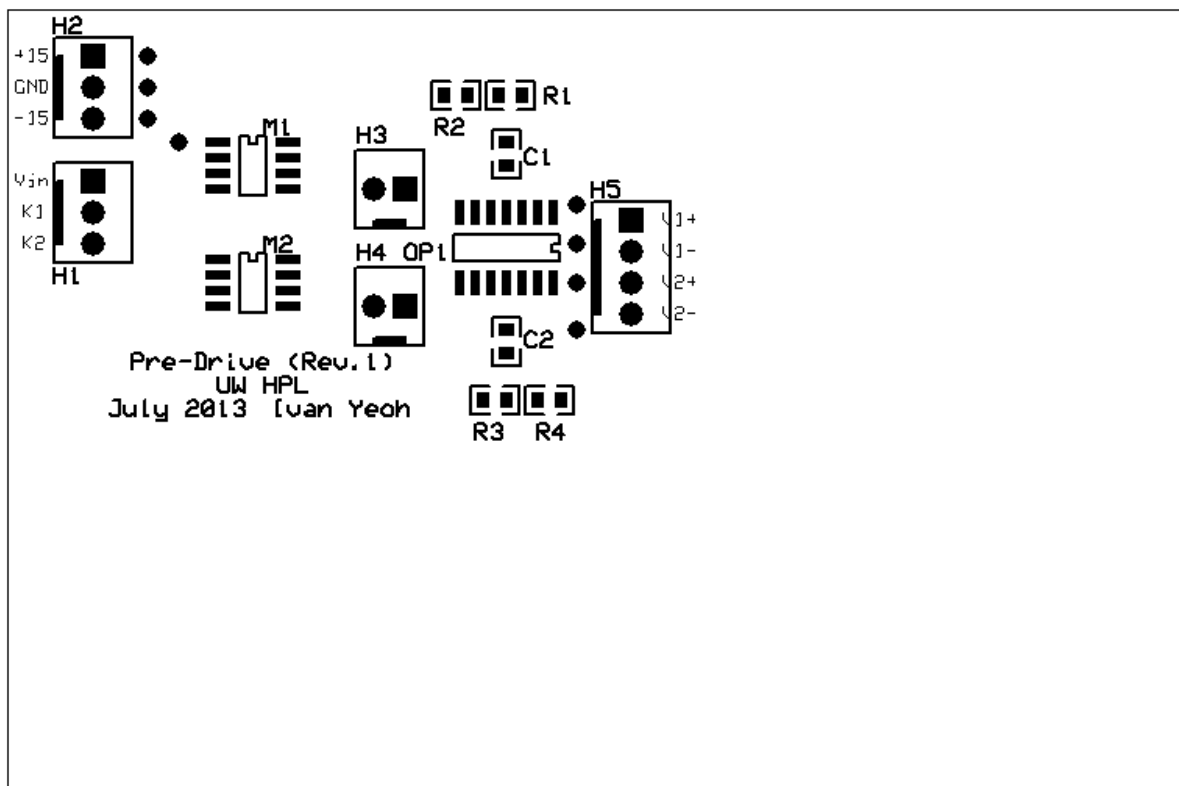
Piezoelectric actuator drive circuit printed circuit board layout.
